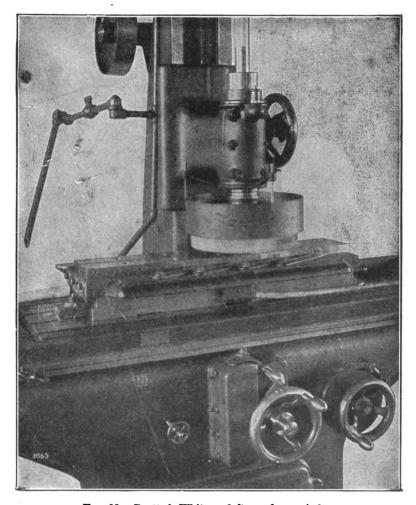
Pratt & Whitney 3-ft. surface grinder.
